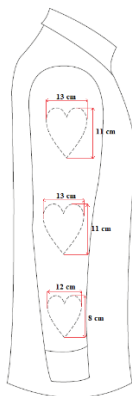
Technical drawing and opening dimensions of the shirt sleeve with manipulation technique (b)
